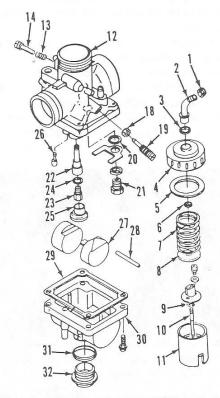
Exploded view of Mikuni VM32SS carburetor used on all models.
